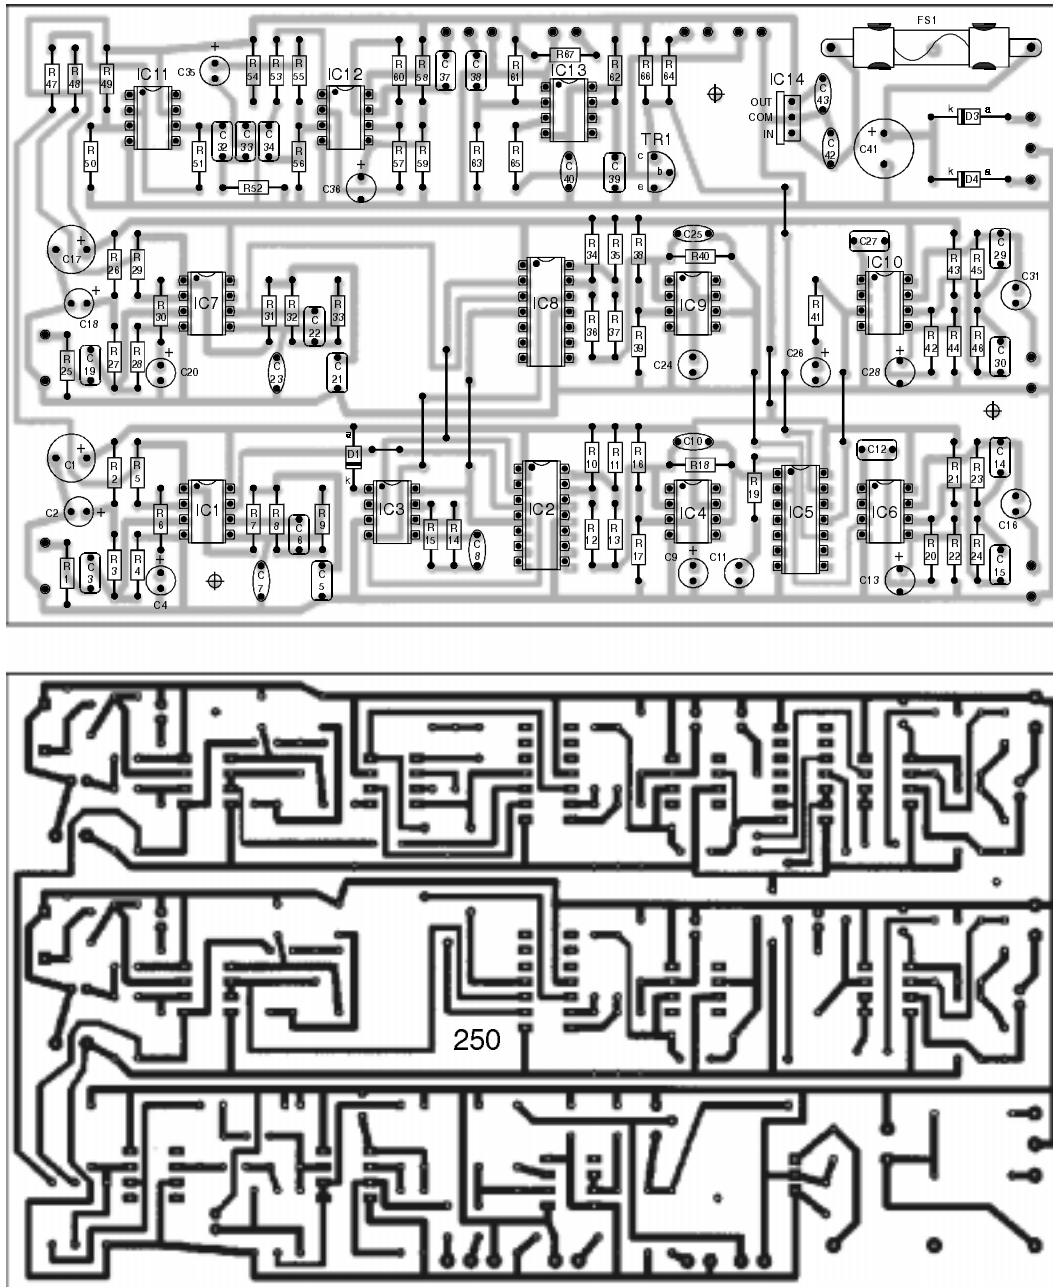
PCB topside component layout and (approximately) full size underside copper foil master for the Scratch Blanker. The interwiring between the PCB and off-board components is shown in Fig.8.
